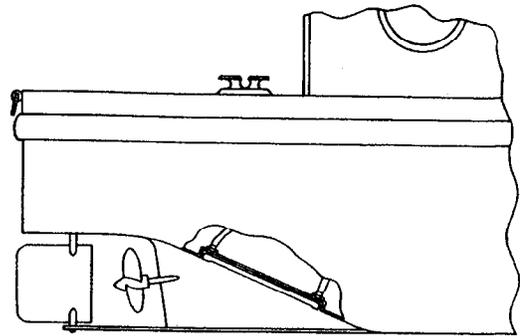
Shallow draft steel river work boat. Flush type installation is made by welding in box-shaped recess in underside of hull.
